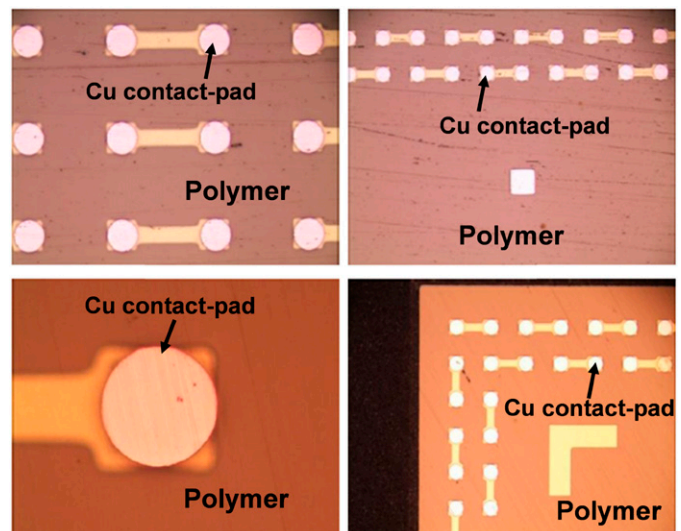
After backgrinding the EMC to expose the Cu contact-pads (Cu revealing).
